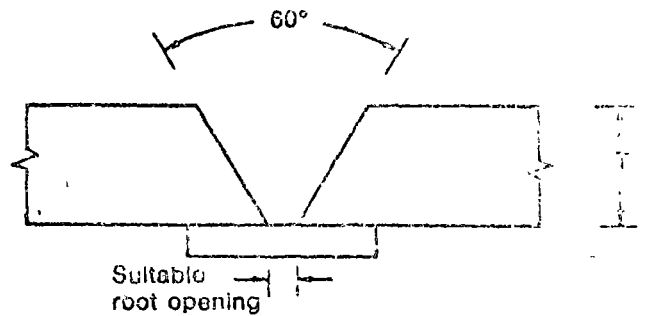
Pipe test butt joint—welder qualification—with backing.
